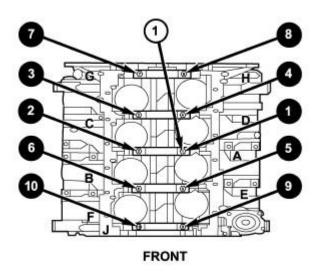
MAIN BEARING CAPS Courtesy of CHRYSLER LLC
